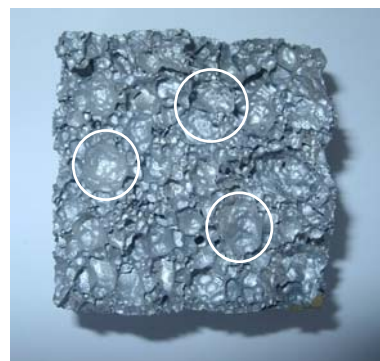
Particulary huge pores on the fracture surface of a HAL foam after fatigue testing
